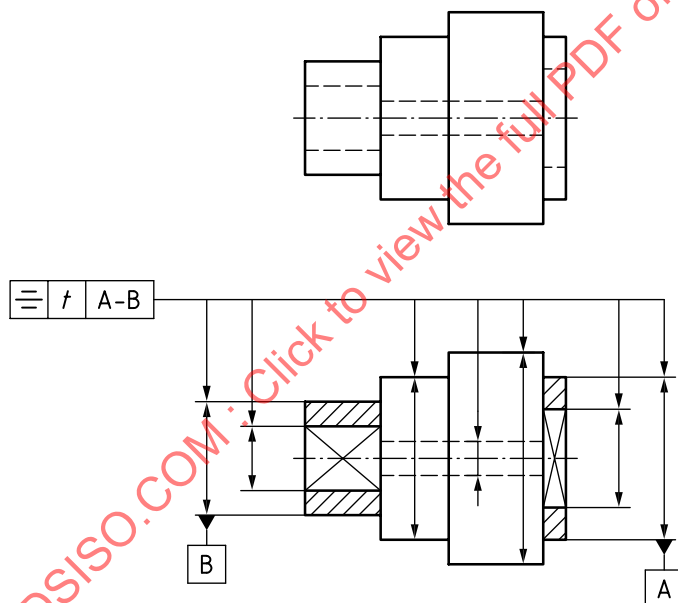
Drawing and meaning of general symmetry tolerances, common datum with the largest sizes
